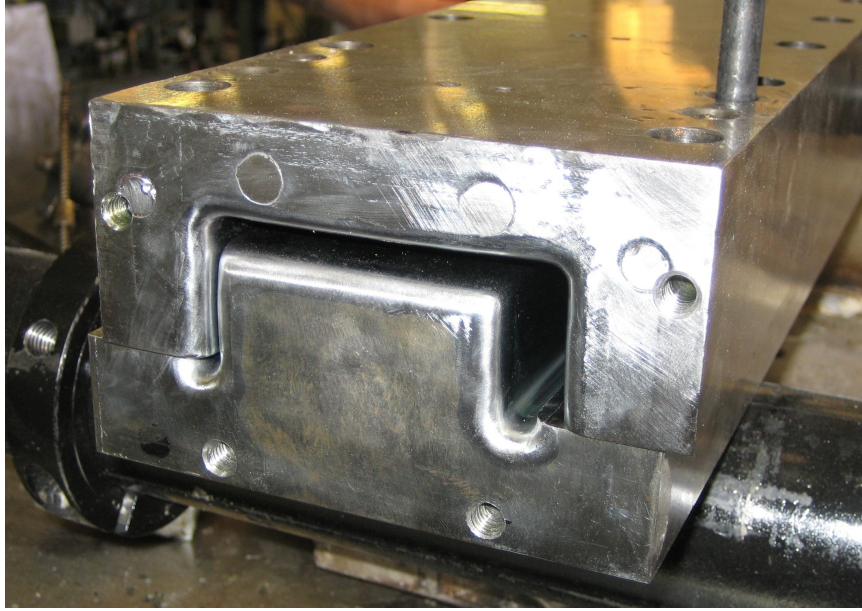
C-channel pultrusion die used for prototype hybrid co-pultrusion run. Note that the upper and lower halves of the pultrusion die are slightly mis-aligned in this photograph; this helps to more clearly illustrate the location of the parting line.
